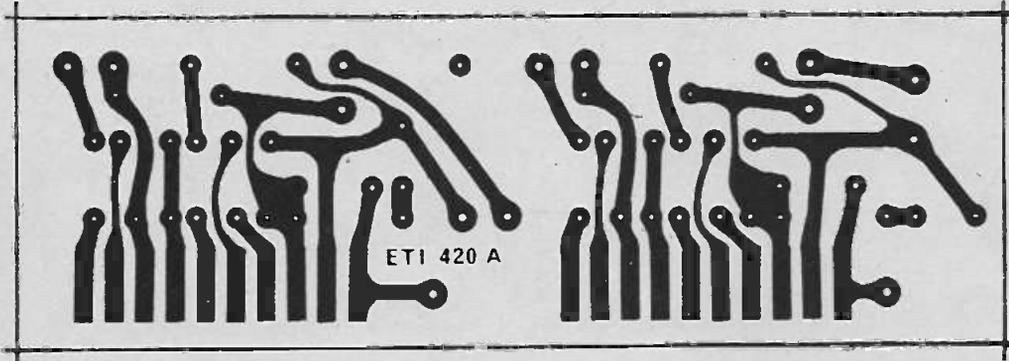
Printed circuit board for the twin power amplifier assembly.
